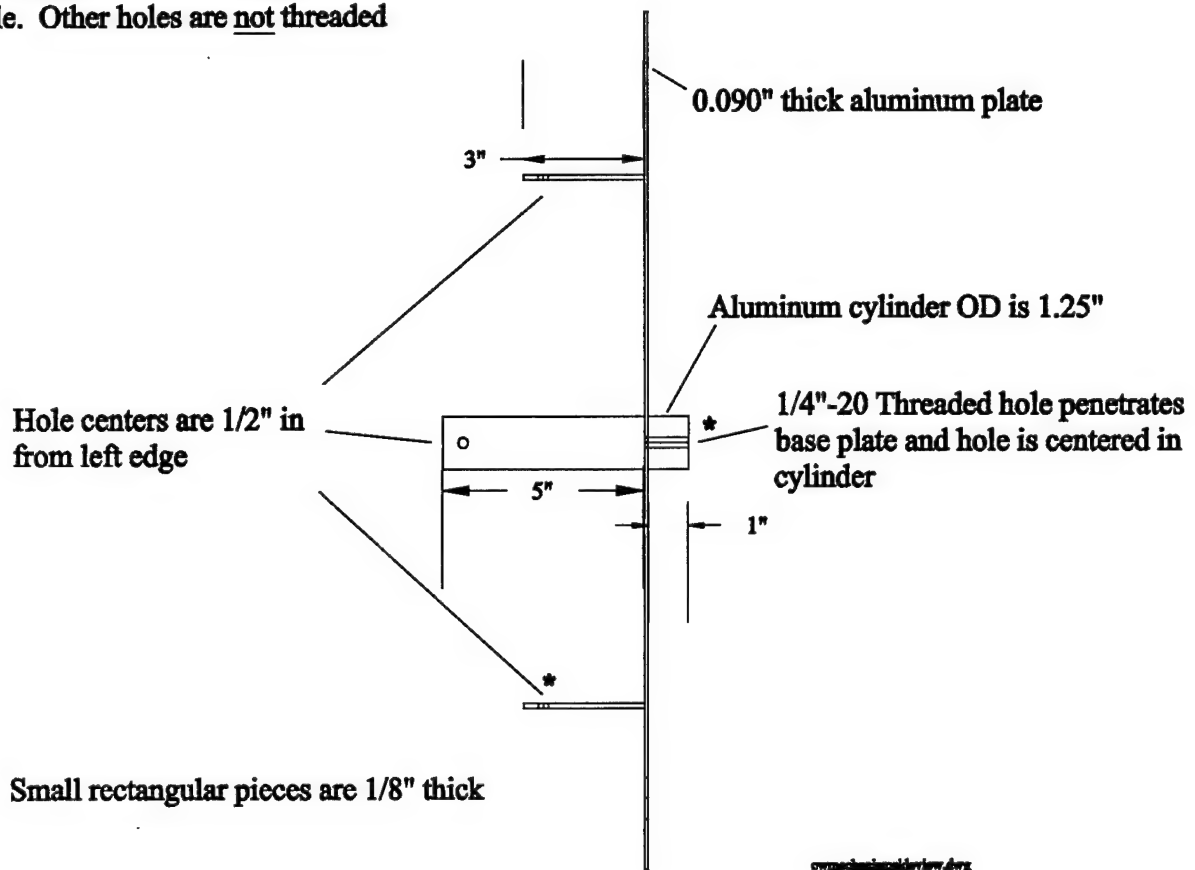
Counterweight Mechanism with Dimensions - Right Side View
